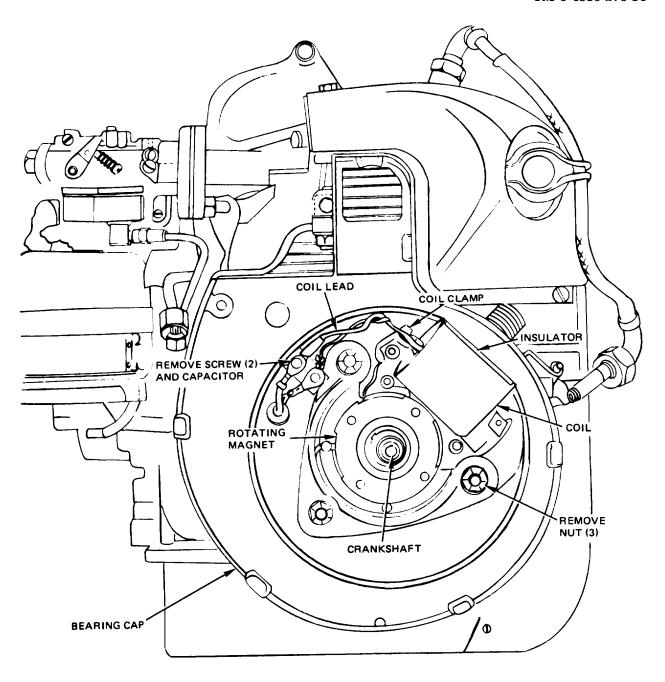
Coil and Rotating Magnet, Removal and Installation (Models 1A08-1 and 1A08-2)
